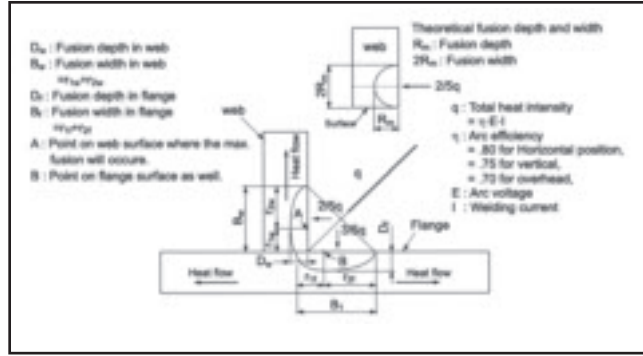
Conceptual model of heat flow and fusion in T-joint fillet weld.
